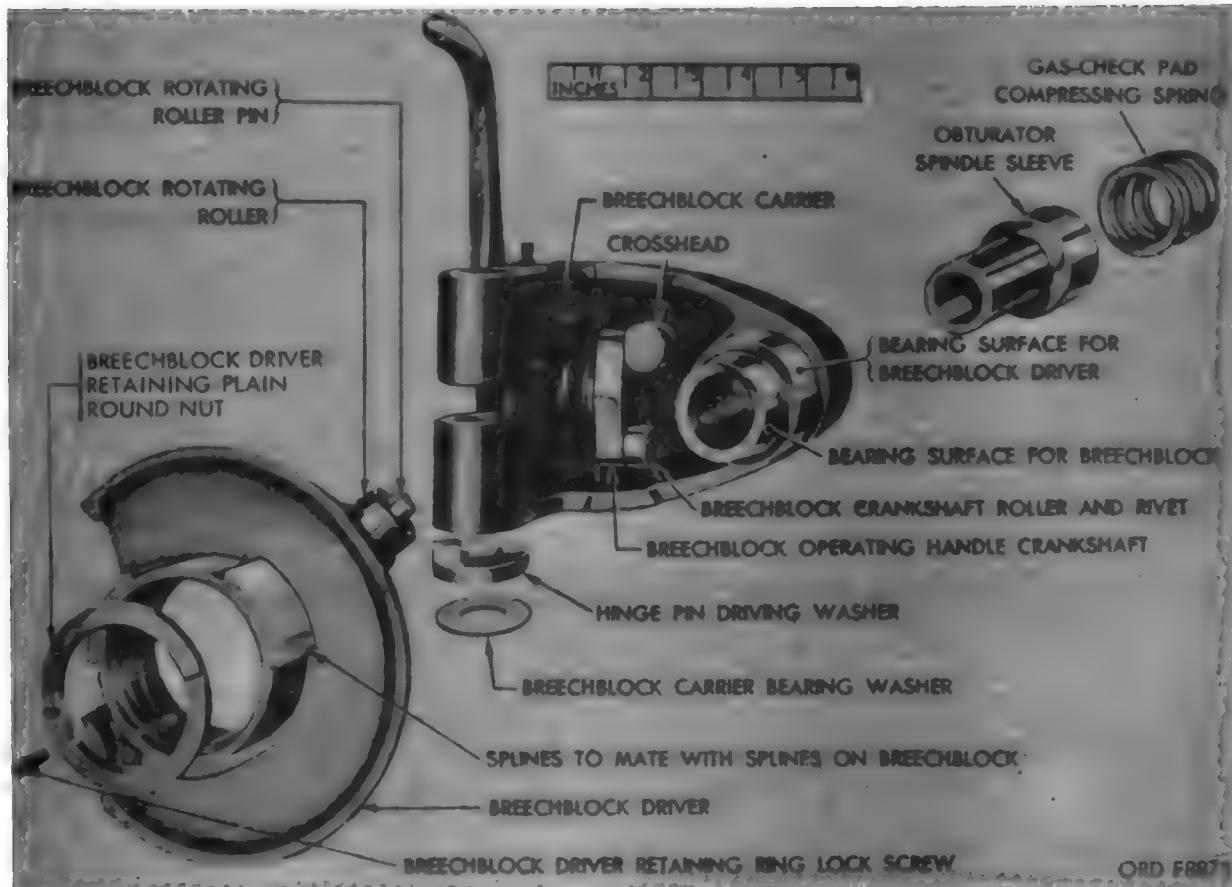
Breechblock carrier and breechblock actuating parts—exploded view.
